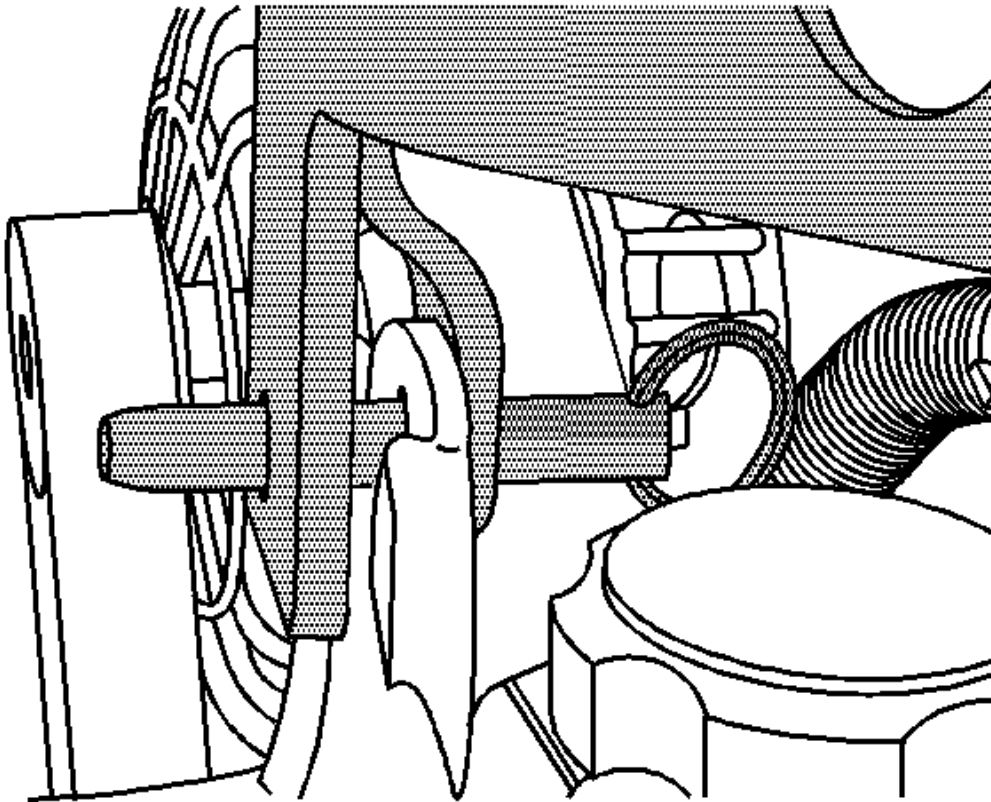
View of J 45057 Installed To Right Side Engine Lift Bracket
